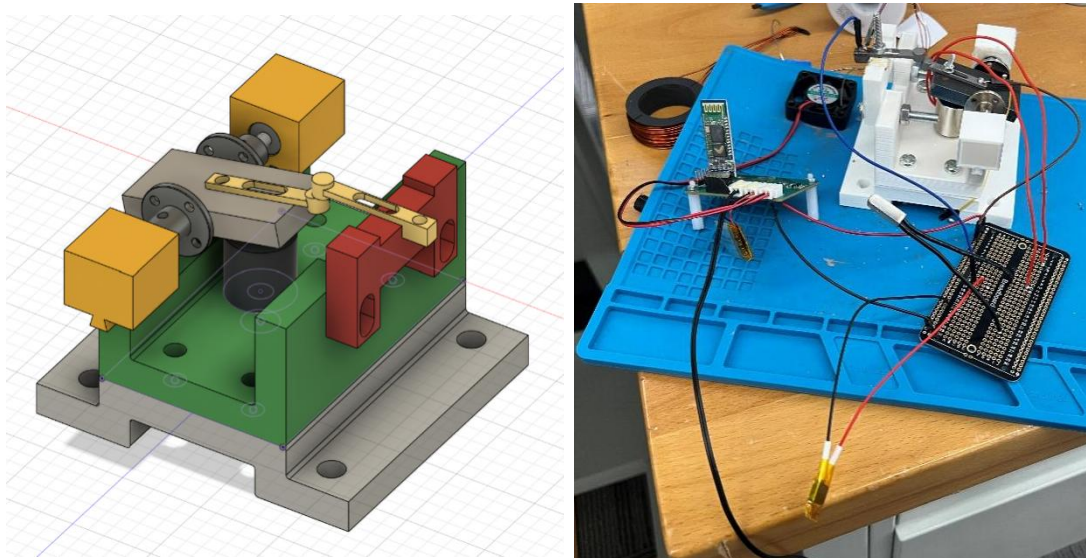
CAD Design of Mechanical Circuit Breaker and Cricuit Breaker
